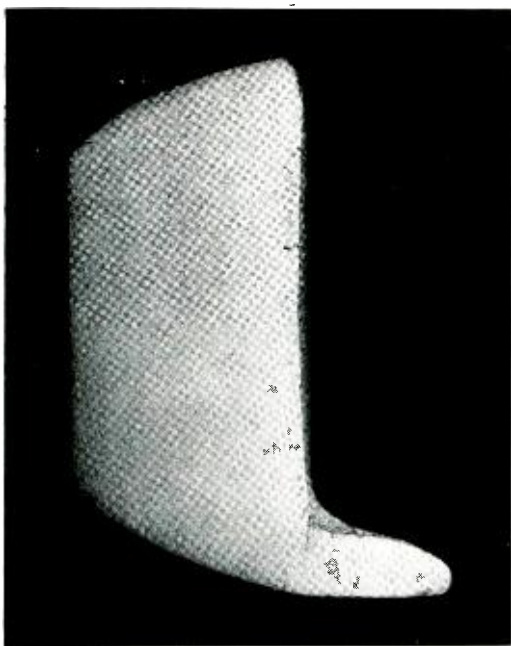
An ingot of wiping solder which was tilted while in the crucible before becoming completely solidified. The lower lip is eutectic drainage from the partially solidified mass
